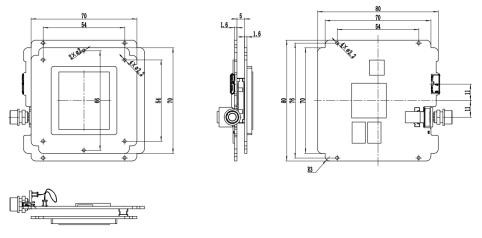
Dimensions of IUCXXX-AFU-EF circuit board (mm)
